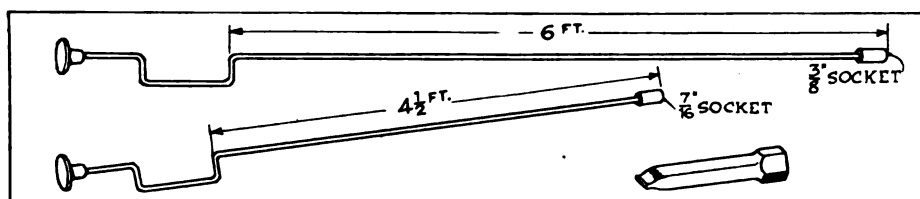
Six-foot $\frac{3}{8}$ -in. socket wrench for universal flanges
